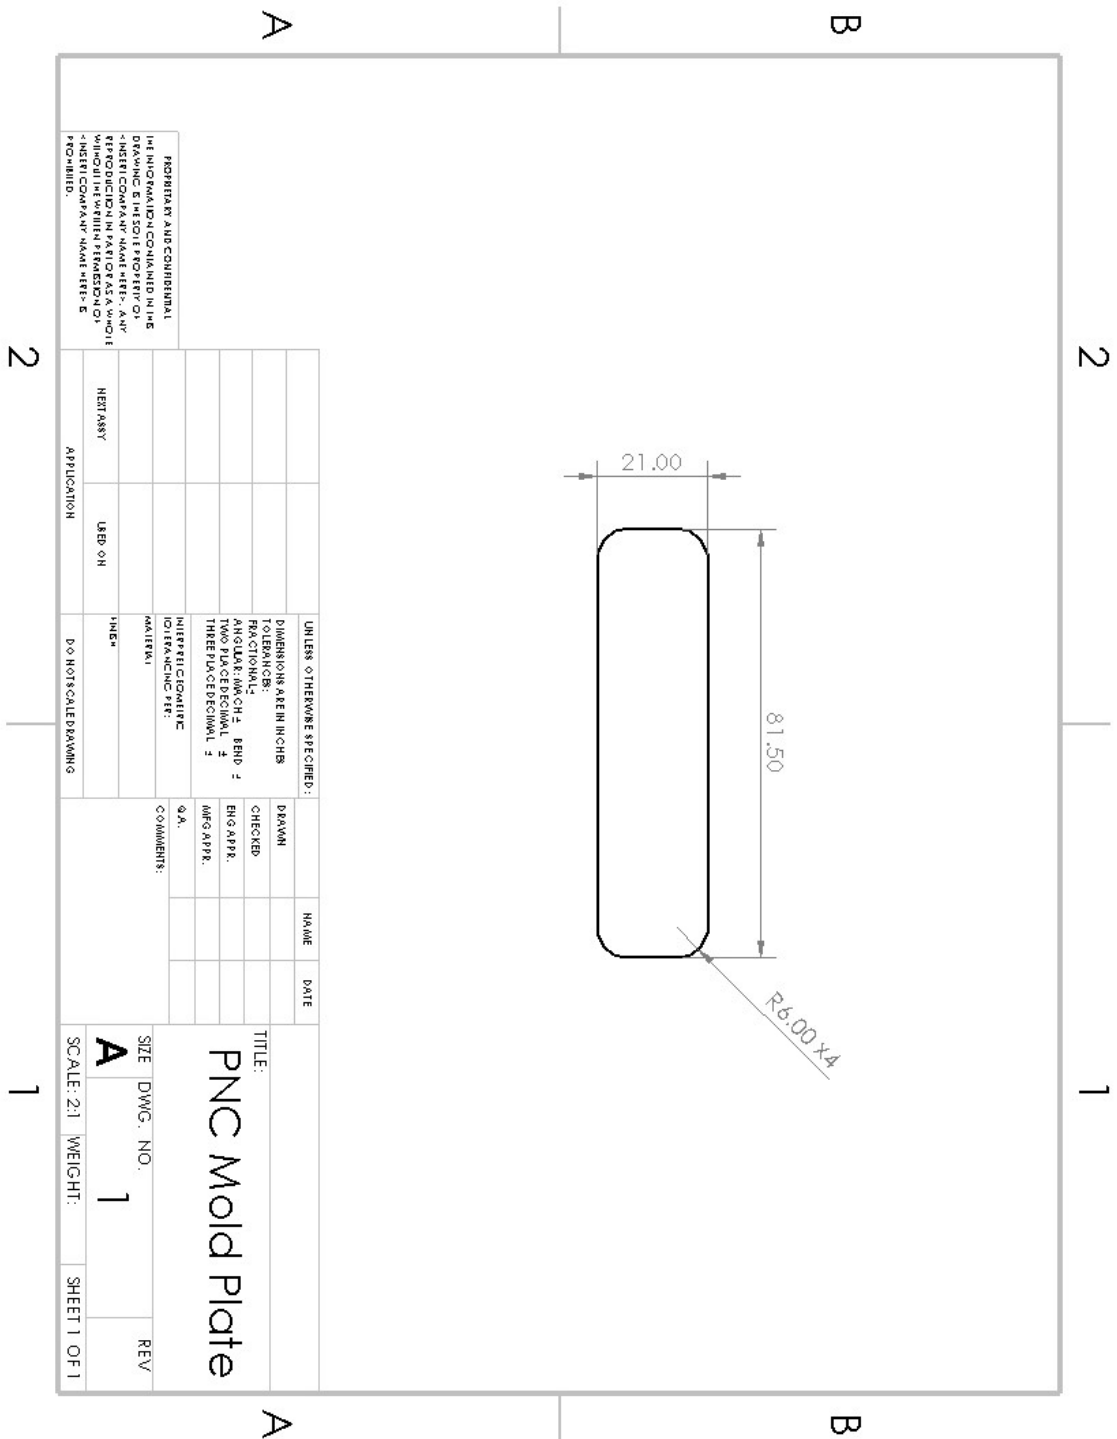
Drawing for the steel mold plate, in mm. 2:1 scale accurate for figure on a full standard letter page.
